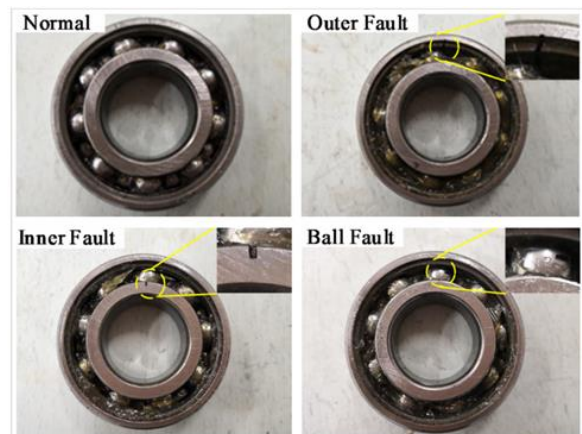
Pictures of HB (healthy bearing), FB1 (bearing with outer race fault), FB2 (bearing with inner race fault), and FB3 (bearing with rolling element fault) [42]
